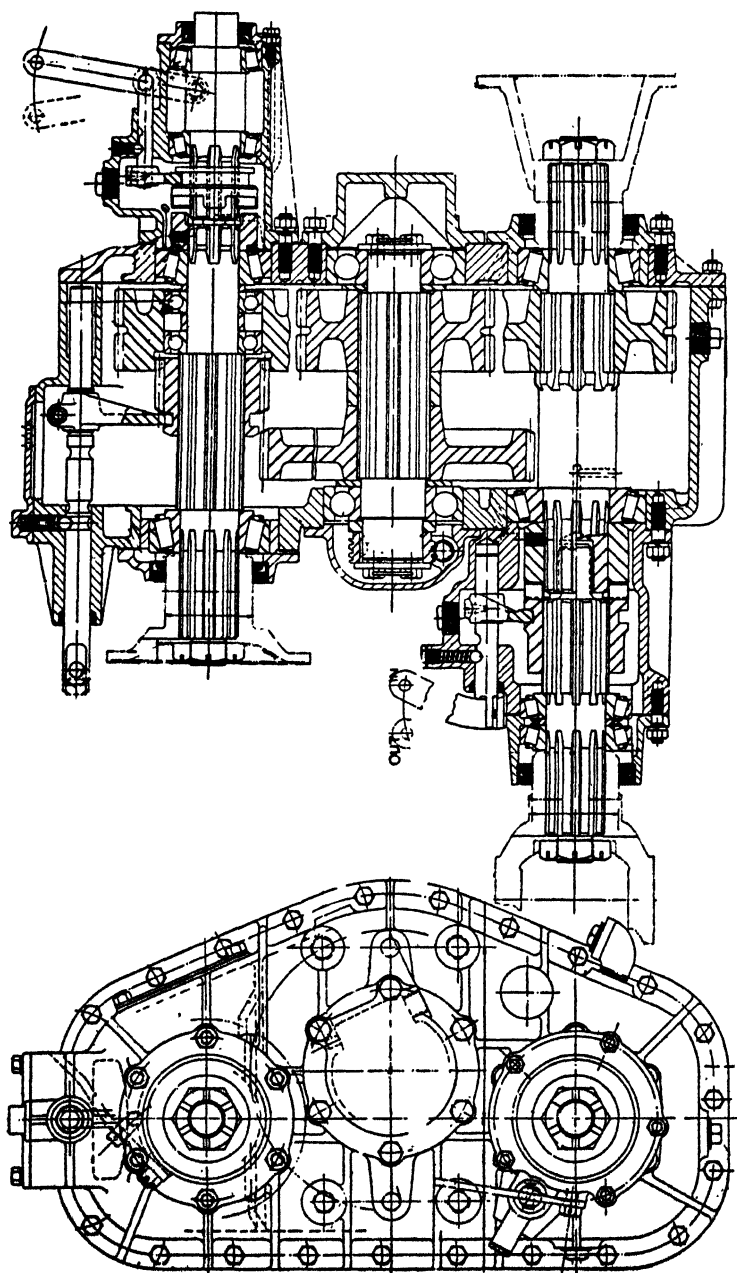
WISCONSIN TRANSFER CASE WITH POWER TAKE-OFF AND FRONT-DRIVE CUT-OUT CLUTCH.
